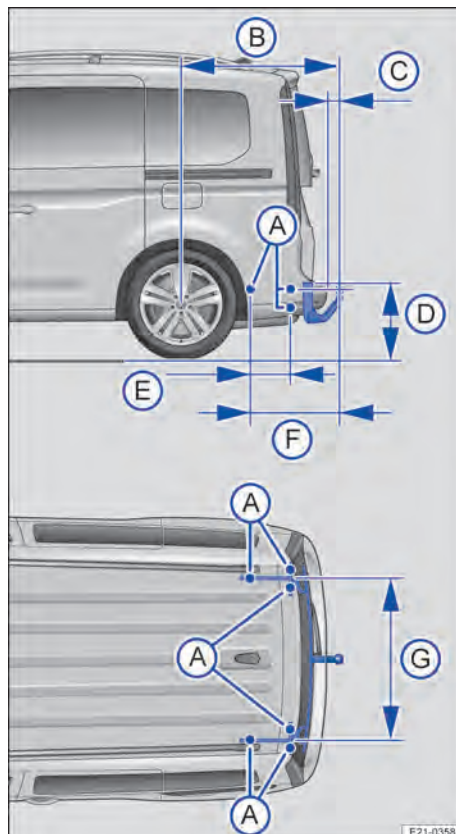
Dimensions and attachment points for retrofitting a towing bracket.
